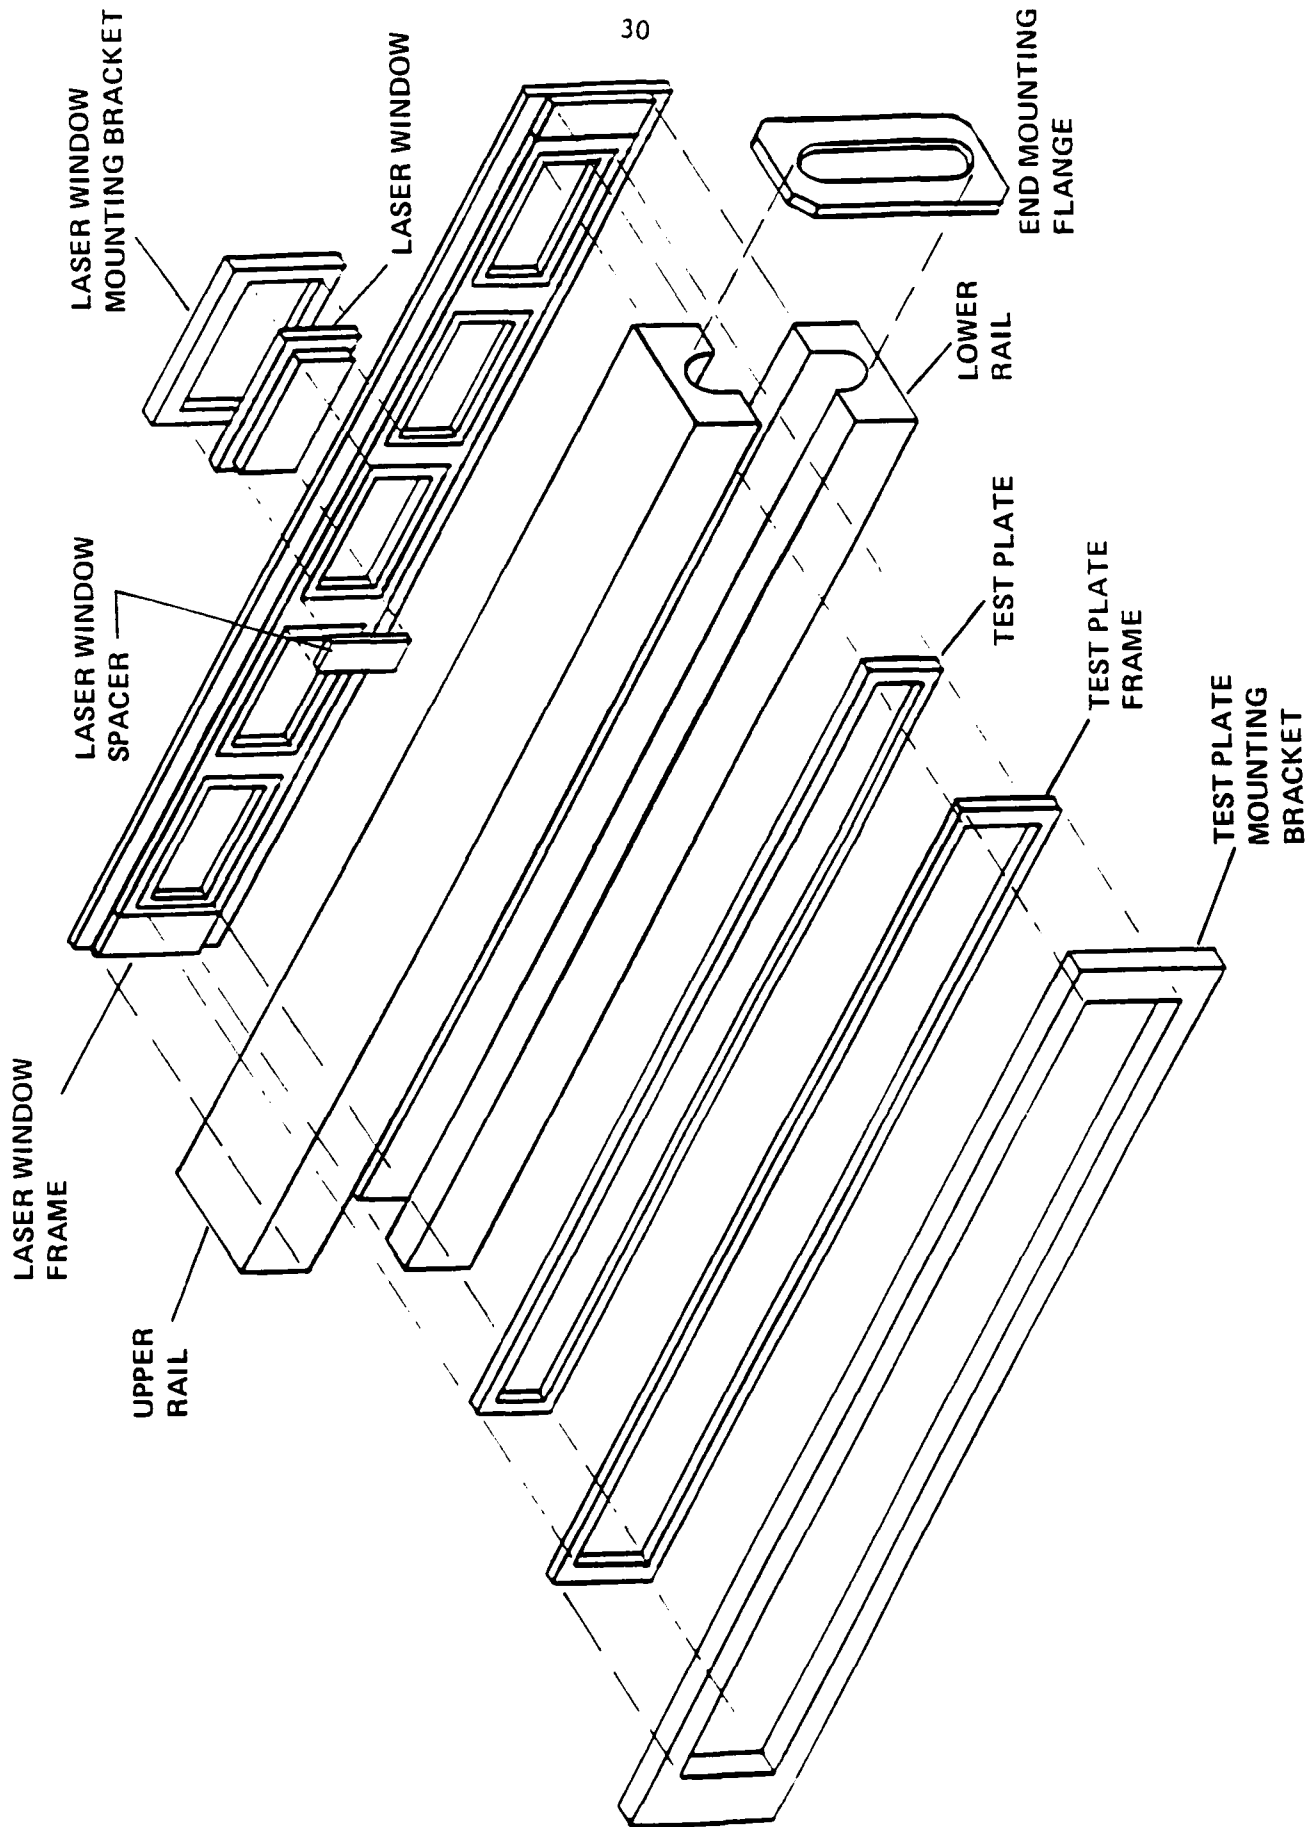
EXPLODED VIEW OF NEW TEST SECTION
